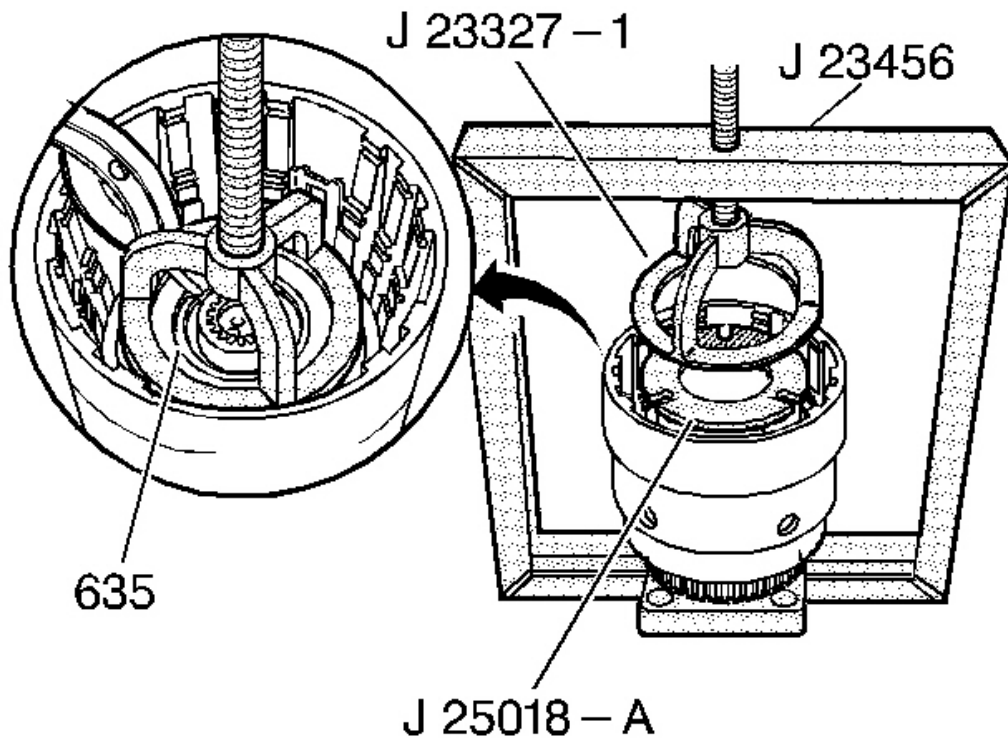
Locating Overrun Clutch Spring Retainer Snap Ring
